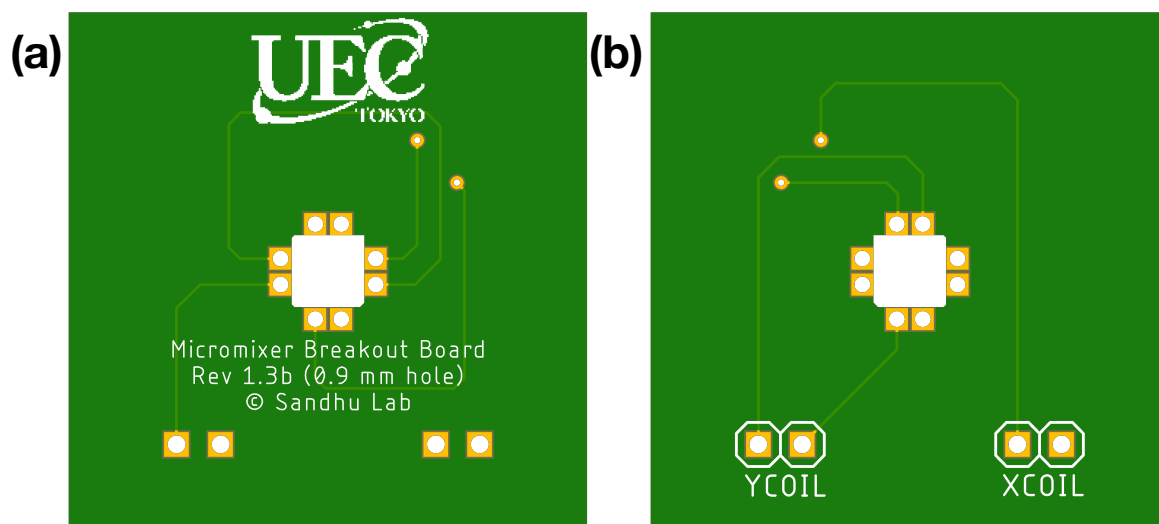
Design of the two layer PCB used for making contacts with the actuator. (a) top side, and (b) bottom side.
